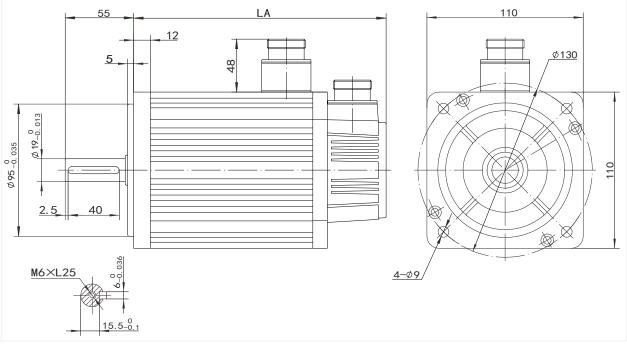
Installation dimension of WE series 110 flange servo motor
